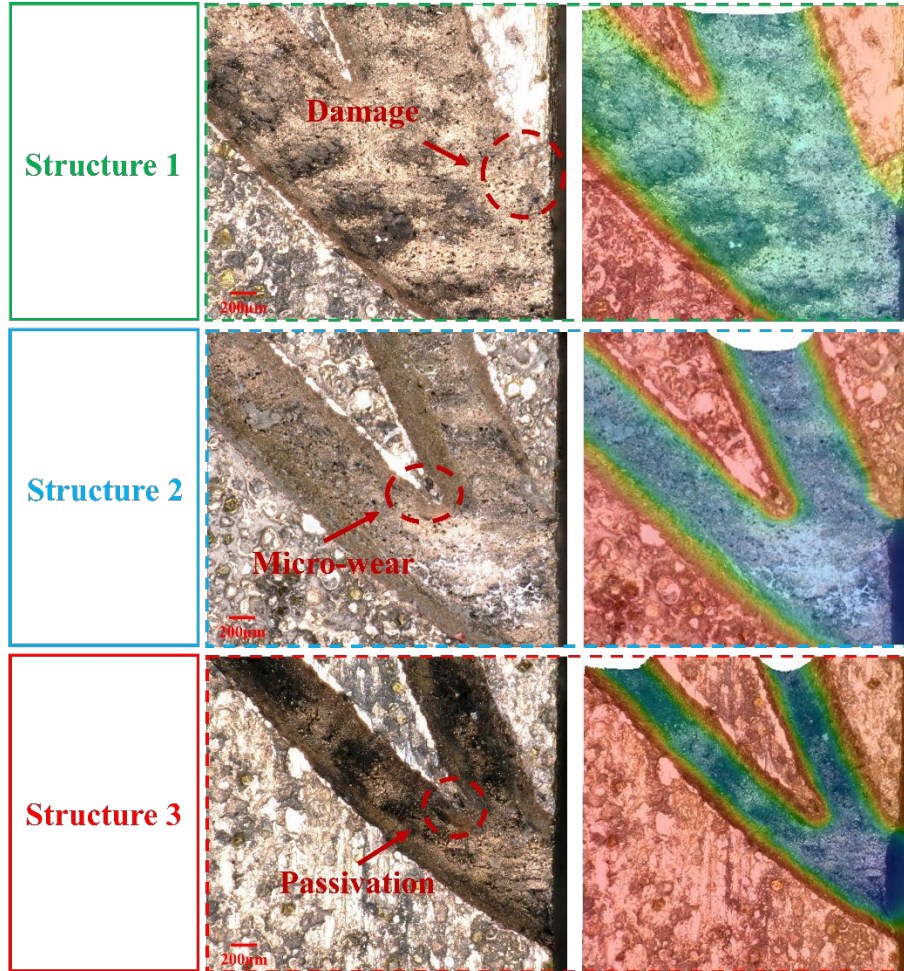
Morphological damage to the grinding wheel edge after grinding.
